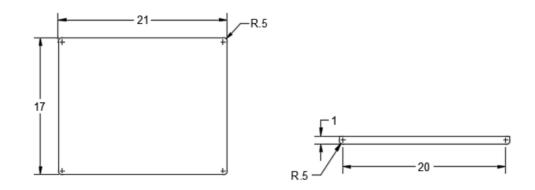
Foam layer in top lid of outer casing drawings, units in inches
